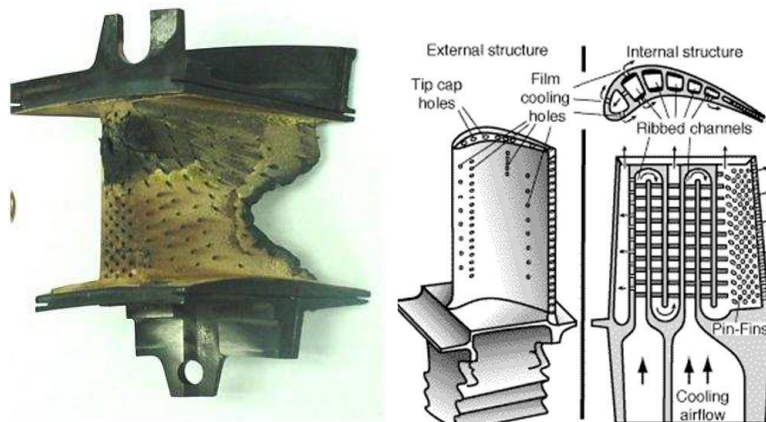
a) Damaged Turbine Blade. b) Turbine Blade Cooling Mechanisms
